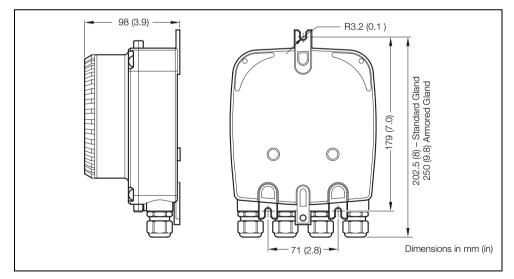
Remote Transmitter Dimensions (Standard Gland Shown)
